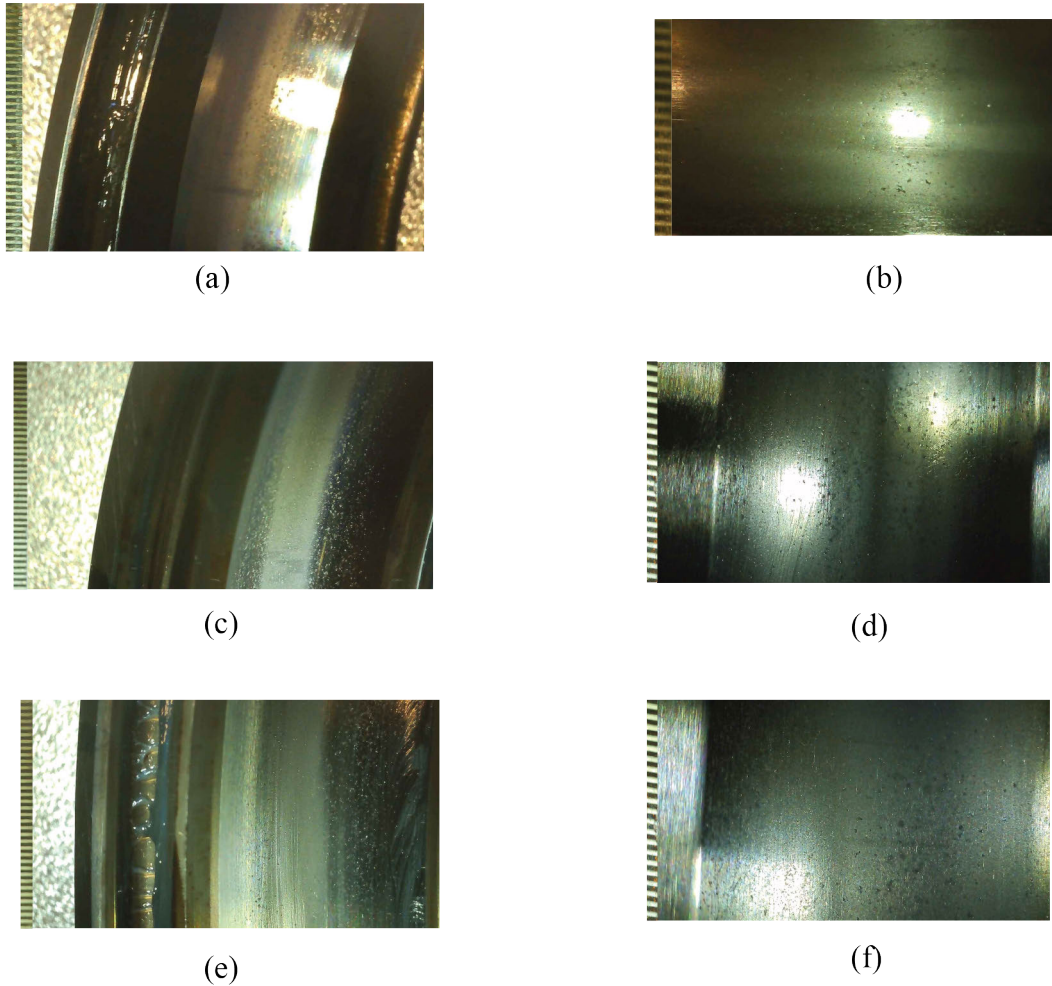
Change in contamination from different bearings. (a) Bearing 6205 Outer Raceway, (b) Bearing 6205 Inner Raceway, (c) Bearing 6206 Outer Raceway, (d) Bearing 6206 Inner Raceway, (e) Bearing 6207 Outer Raceway, (f) Bearing 6207 Inner Raceway
